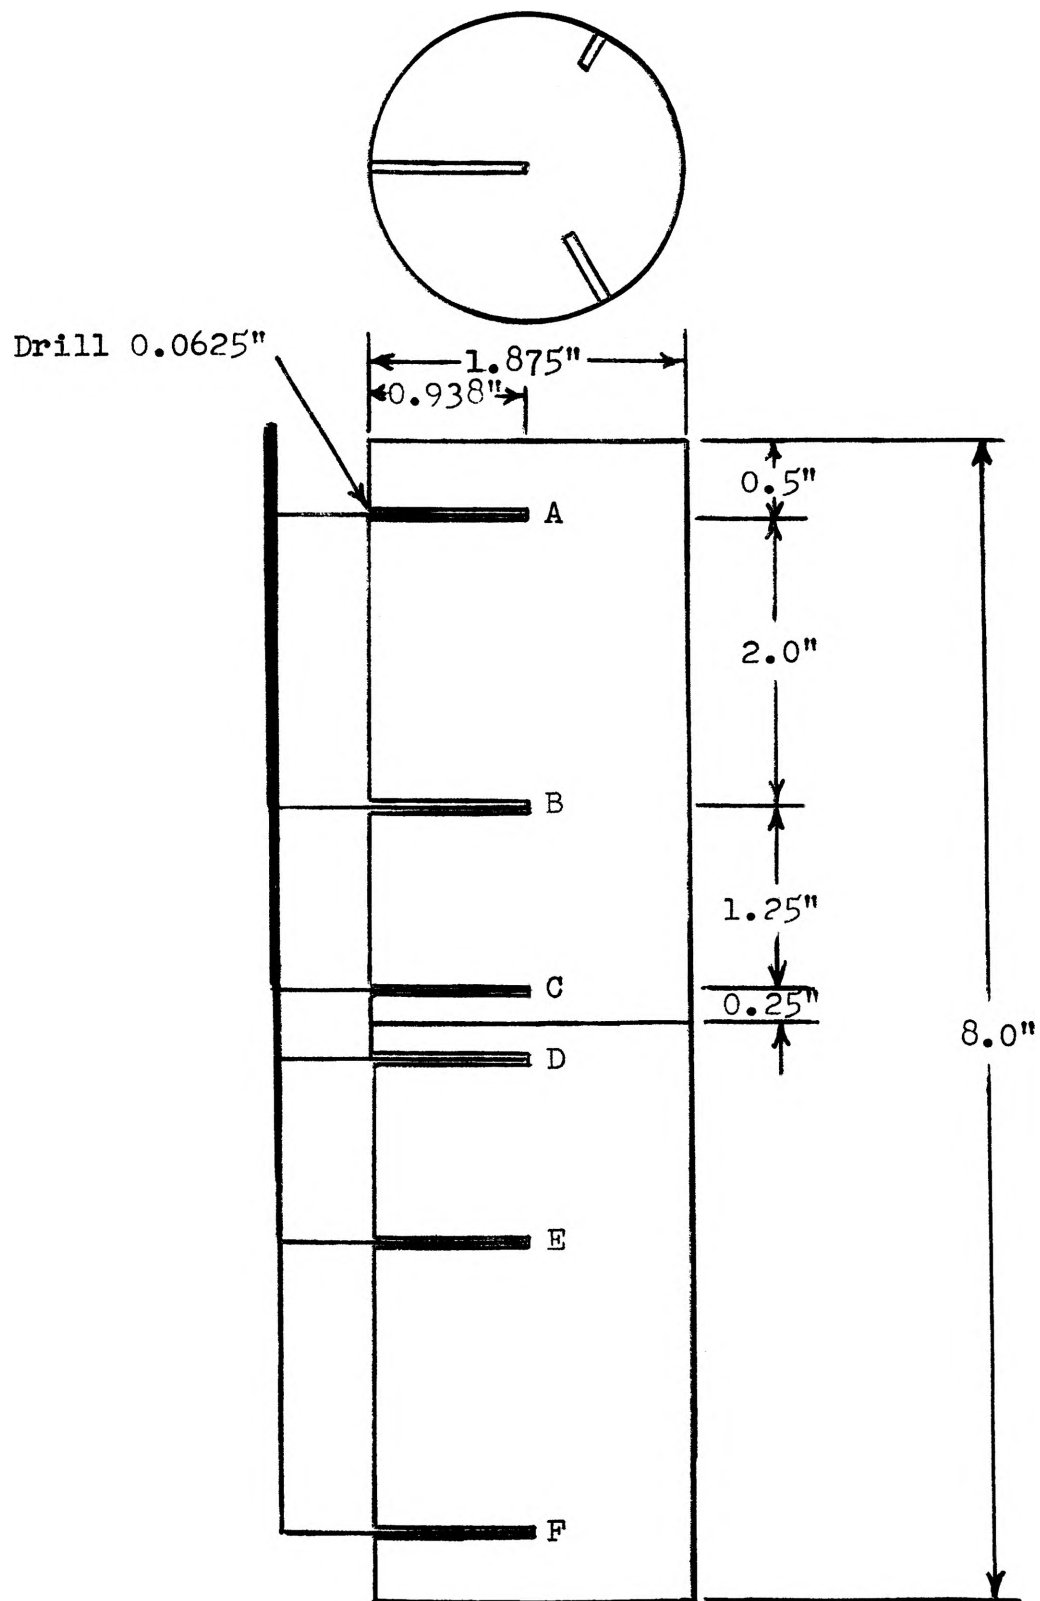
Test Specimen Details and Thermocouple Numbering System
